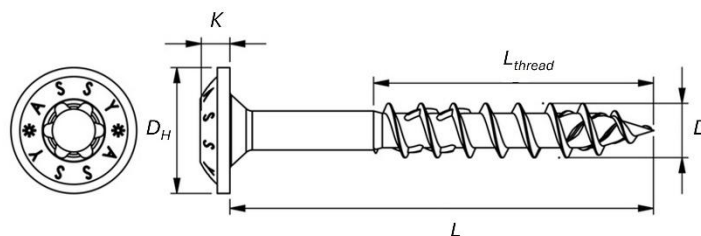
ASSY 4 SCREW WITH WASHER HEAD (WH)
